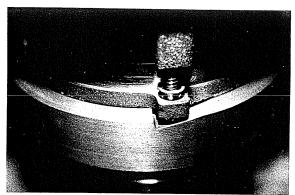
Lift Pin, Spring and "E" Locking Ring
